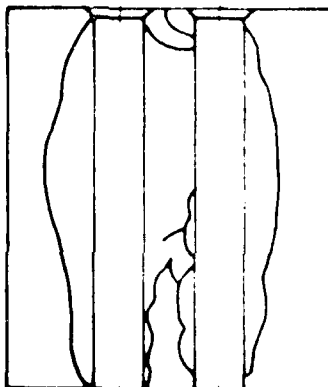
(iv) FRACTURES TYPE (aiv) SPECIMENS. REAMED 4 mm,
